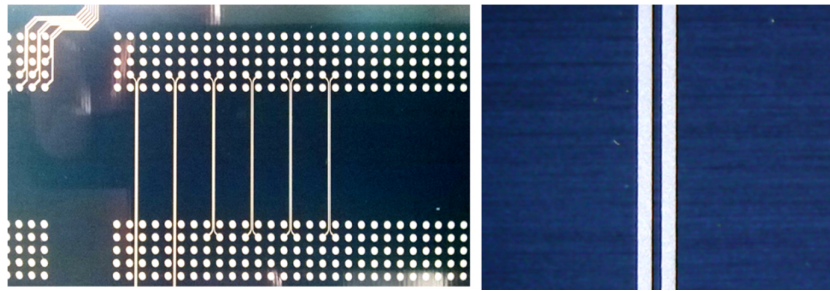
PCB design used in manufacture after tin plating, highlighting on right close-up of isolated differential pair tracks.
